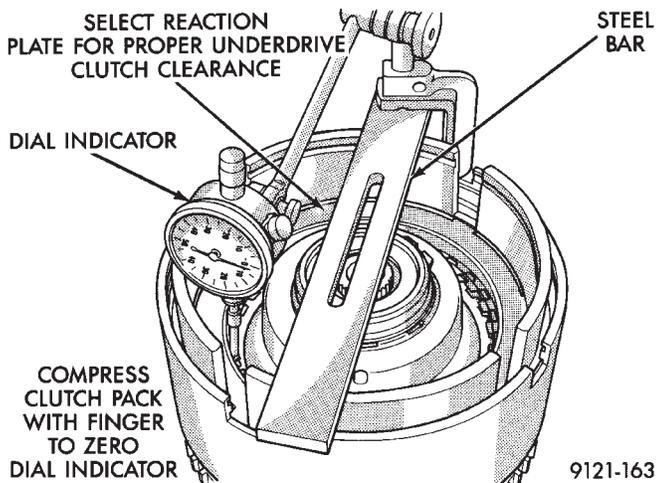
Set Up Dial Indicator for Clutch Clearance
